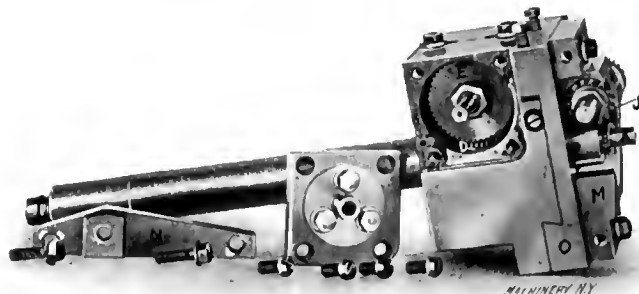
Rear View of Attachment showing Driving Clutch, Worm-gear and Tooth-cutting Tool
